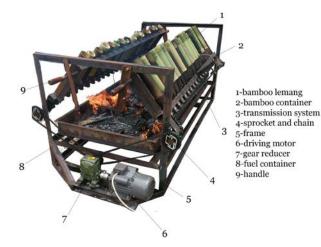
The prototype of *lemang* rice cooking machine integrated with a continuous rotating system
